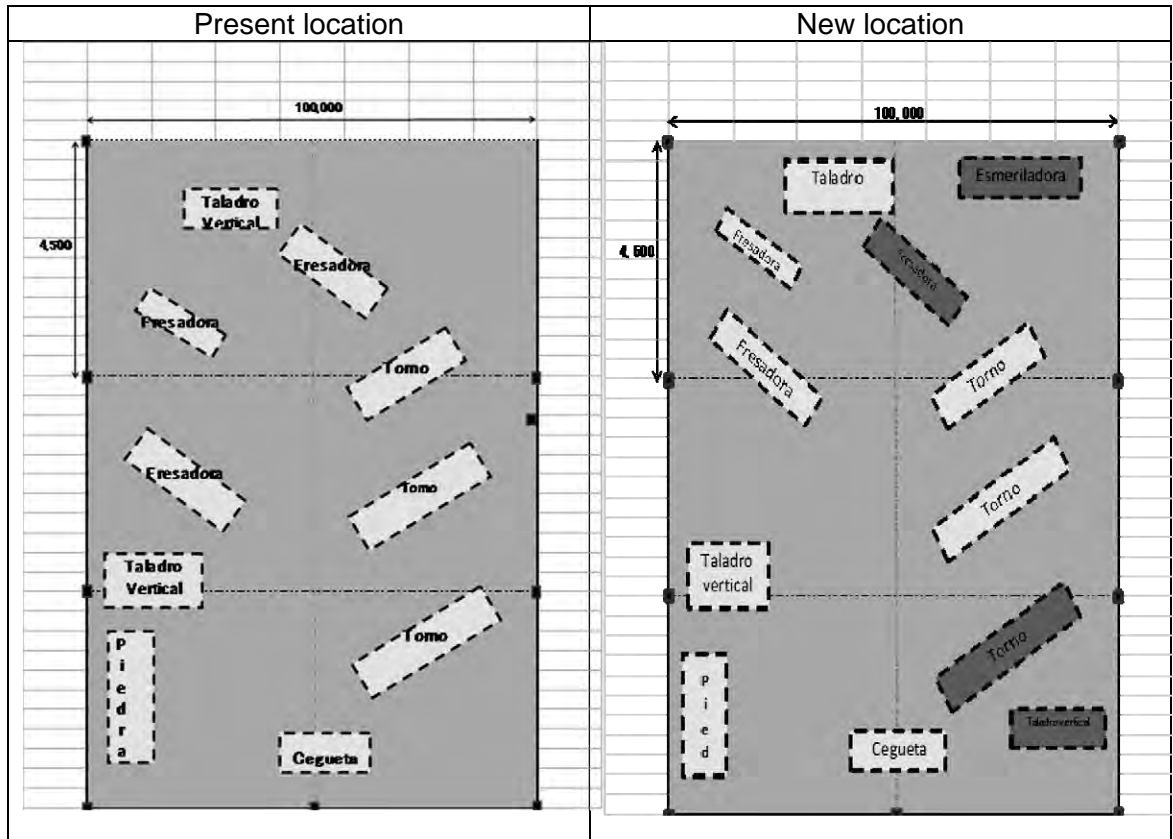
Concept of Equipment Location in the Machine Tool Area (Unit: mm)
